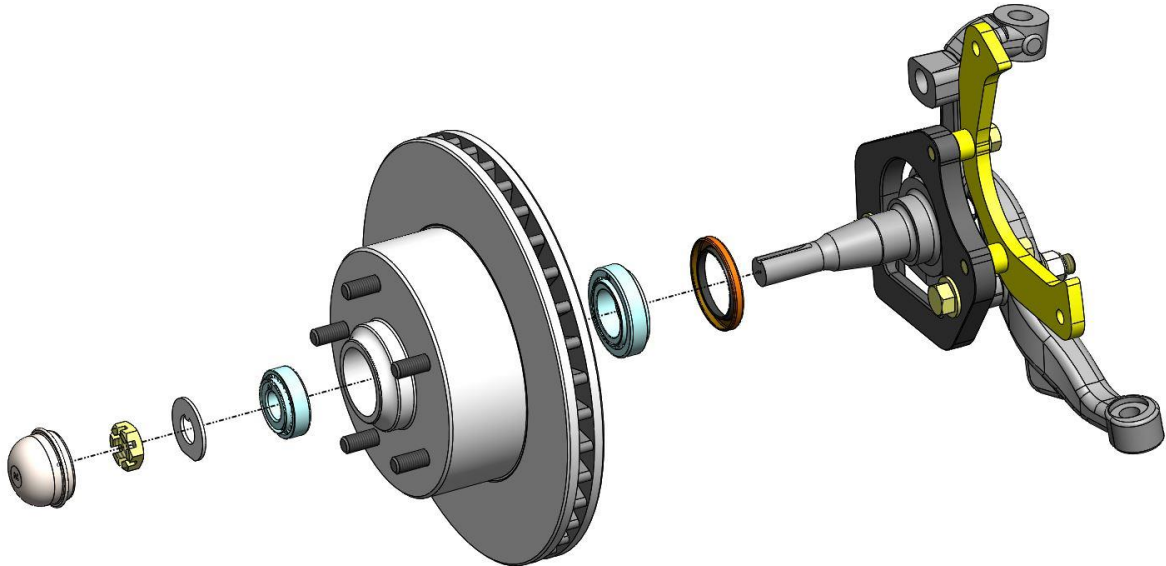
Rotor Installation (Driver Side F-Body Spindle Steer Arm Shown Above)
